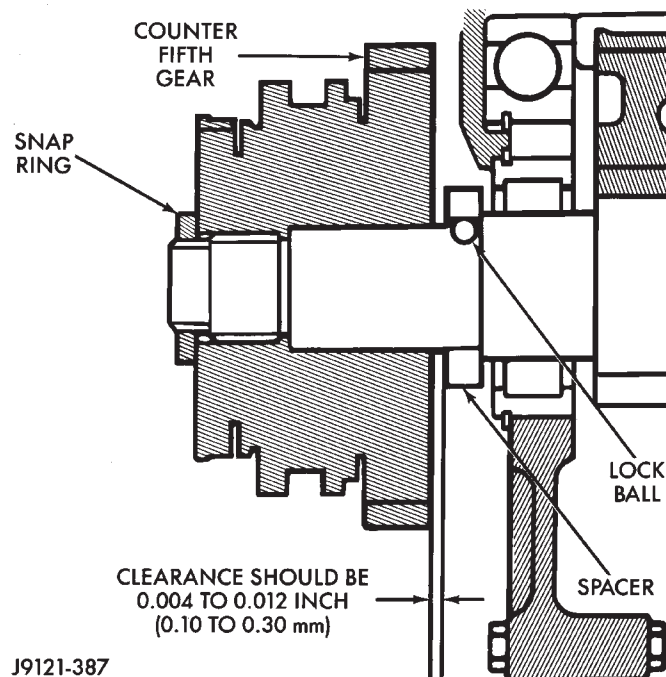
Measuring Counter Fifth Gear Thrust Clearance
